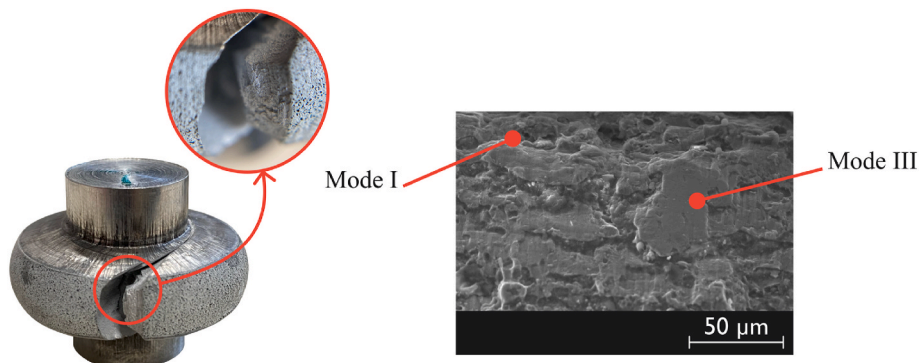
Photograph of a test specimen at fracture with SEM image of the cracked surfaces.
